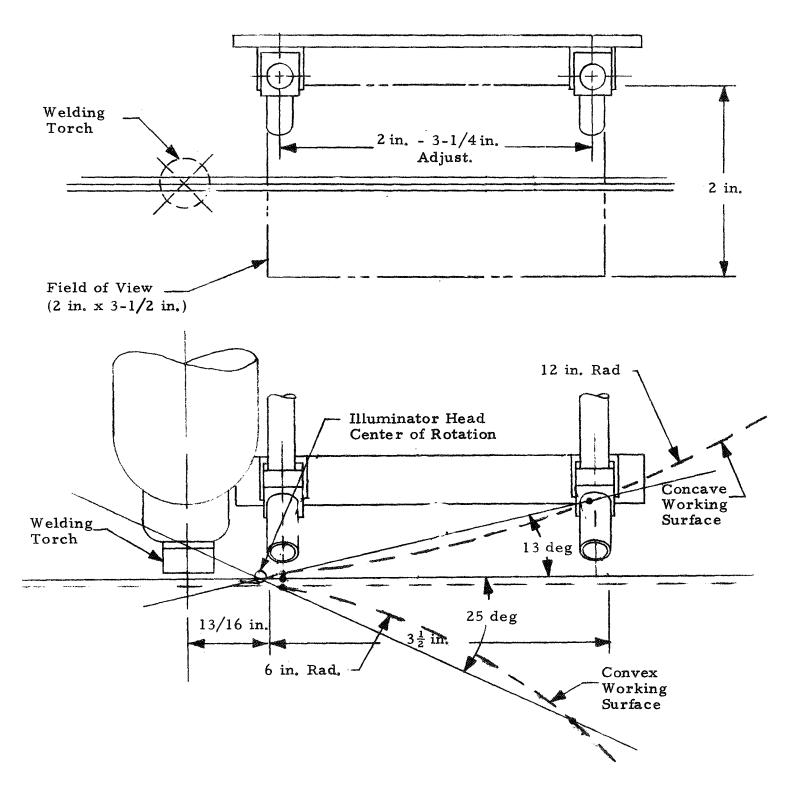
Welding Adapter Viewing Area
